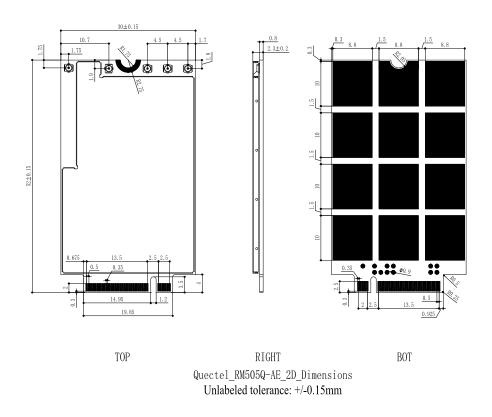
Mechanical Dimensions of RM505Q-AE (Unit: mm)
